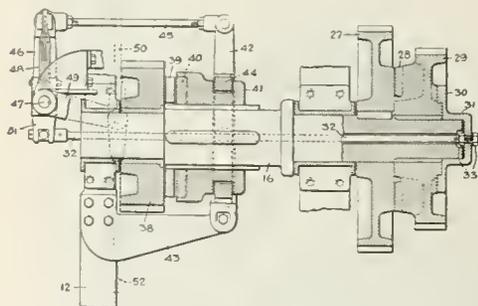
A Longitudinal Horizontal Section of a Clutch Shaft
